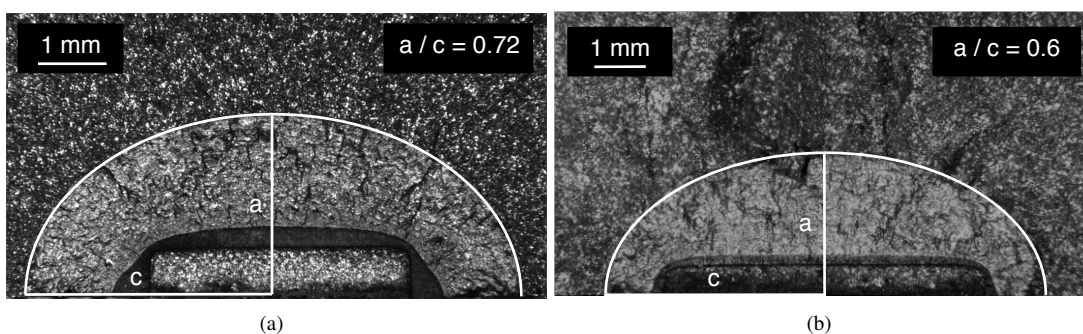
Fracture surface of two large scale specimens after the end of the test. a) Initial defect depth 1.4 mm, $R = 0.5$; b) Initial defect depth 0.7 mm, $R = -1$.
